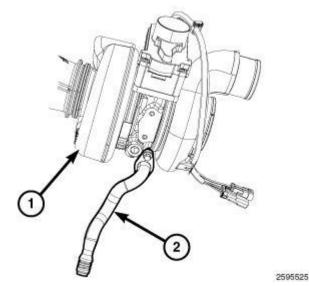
Turbocharger & Drain Tube Courtesy of CHRYSLER GROUP, LLC
